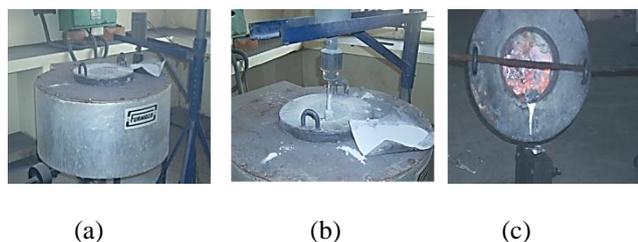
(a) Stir casting set up (b) Stirring process(c) Pouring of melt in moulds
